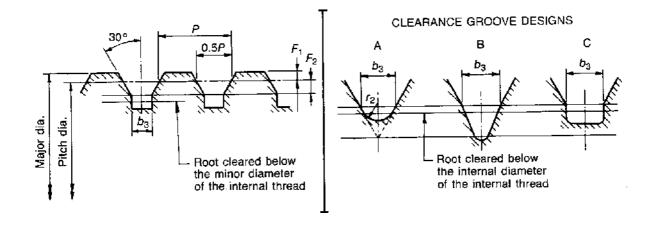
PROFILE FOR PLUG TYPE GAUGES WITH TRUNCATED FLANKS
